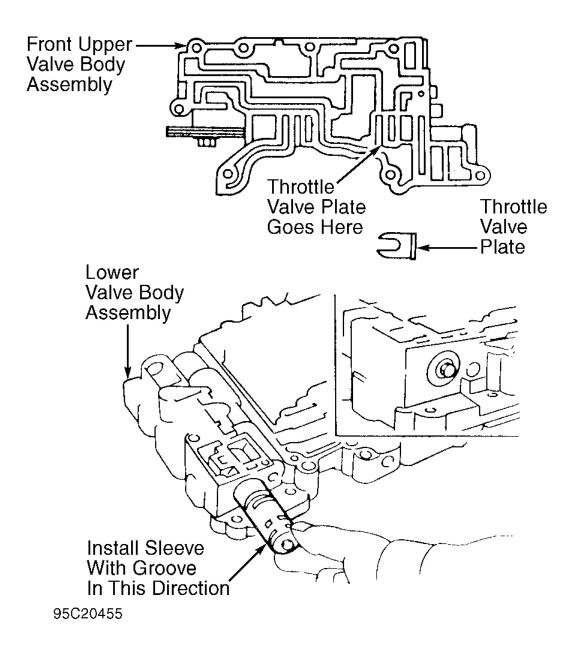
Installing Throttle Valve Plate & Sleeve In Lower Valve Body Assembly Courtesy of ISUZU MOTOR CO.
